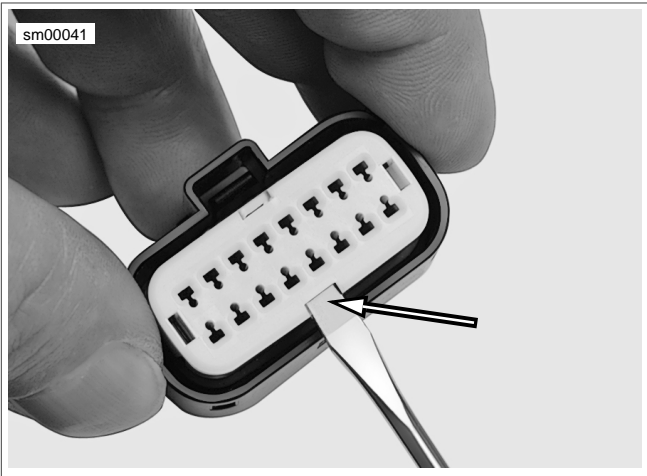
Molex Connector: Secondary Lock Pry Slot (Socket Housing)
